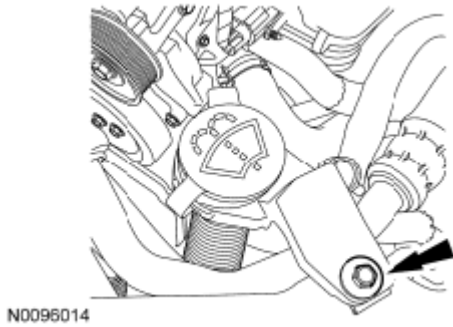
Locating A/C Tube/Windshield Washer Reservoir Bracket Bolt
